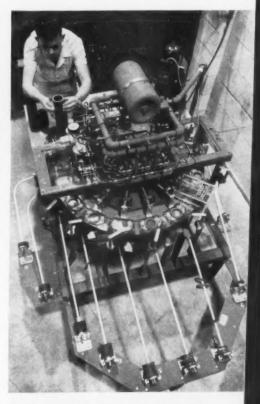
Resistance spacer tester is an automatic test and inspection machine that checks and sorts lightning arrester gap resistance spacers. This nine-station machine checks the spacer for dimensions, high voltage, and flashover, and then sorts the spacers according to their particular resistance value.
